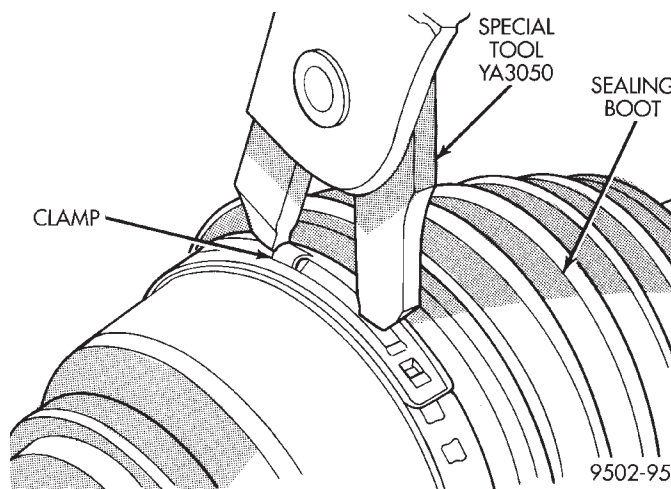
Clamping Tool Installed on Sealing Boot Clamp
